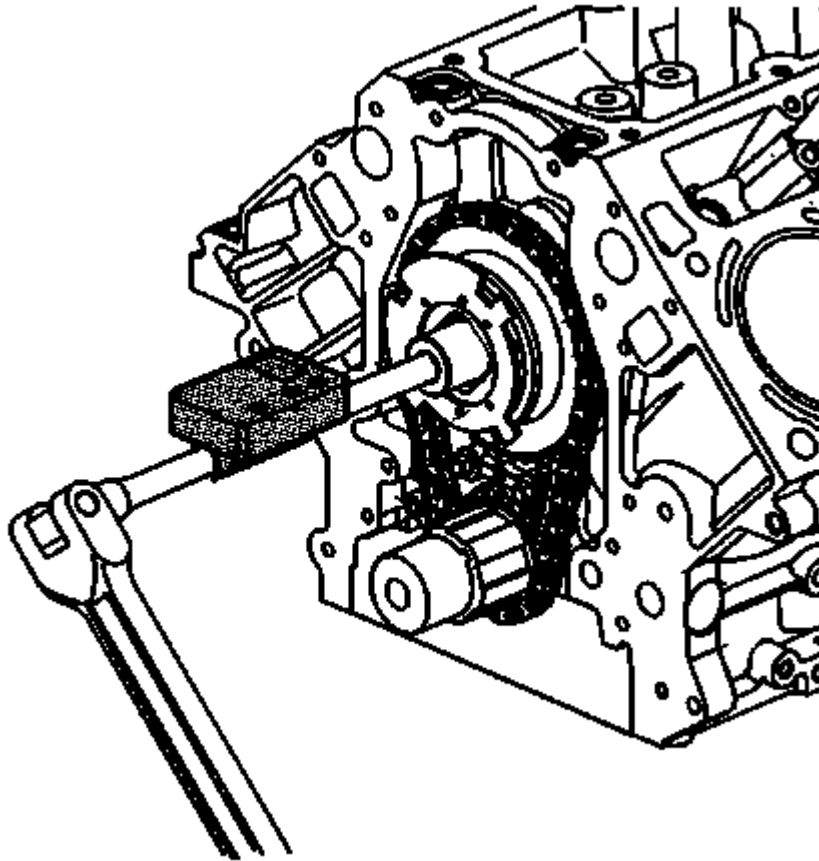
View Of CMP Actuator Alignment Mark & Crankshaft Sprocket Alignment Mark
